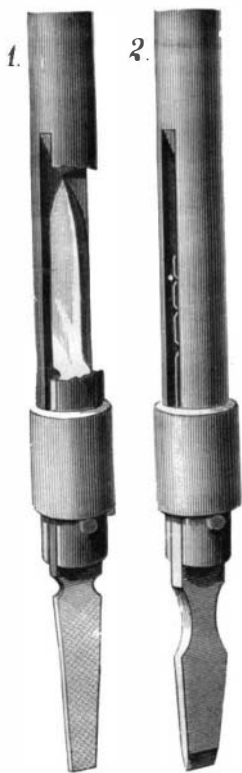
shows a bit of steel having on one end a pen-knife and on the other a file. Fig. 2 shows a combined gimlet, bit, and screwdriver. These tools are held in position in the handle by the ferrule. When it is desired to reverse them the ferrule is moved upward on the handle.
